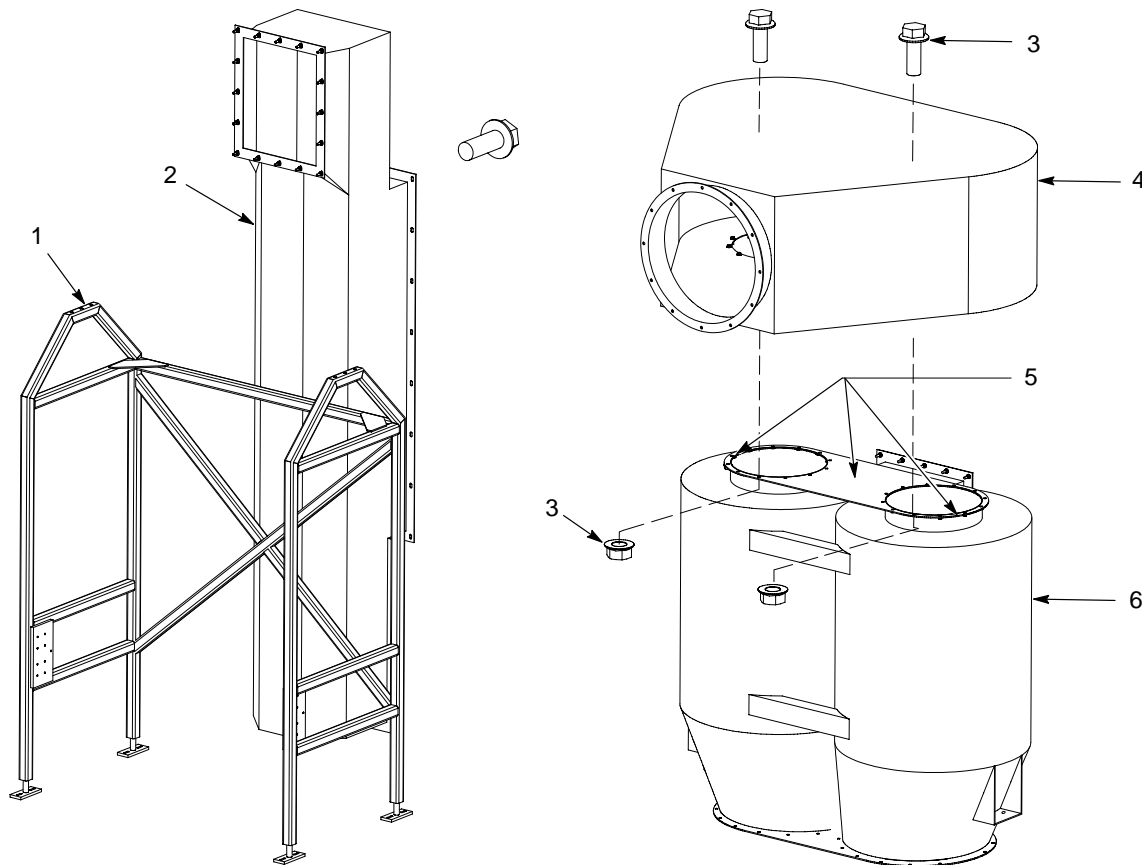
Cyclone Stand Positioning and Cyclone/Banjo Assembly (Typical)
